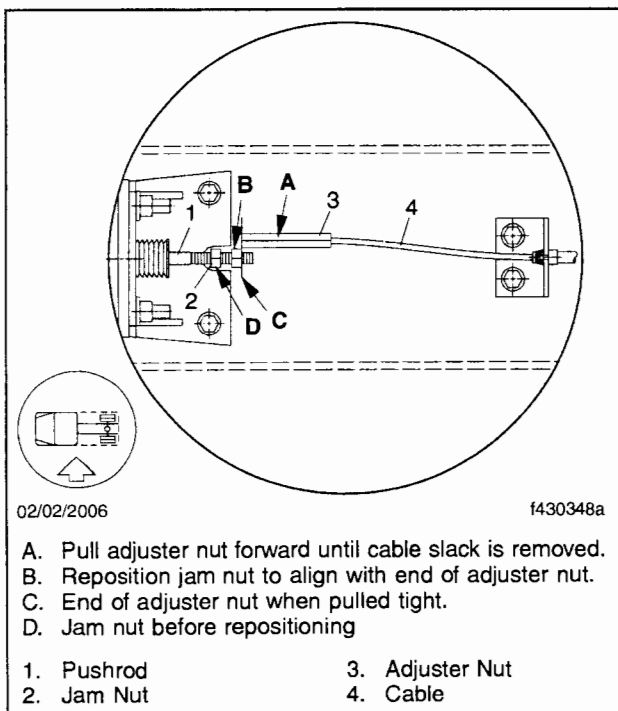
, Cable Adjustment, Air-Actuated Parking Brake
